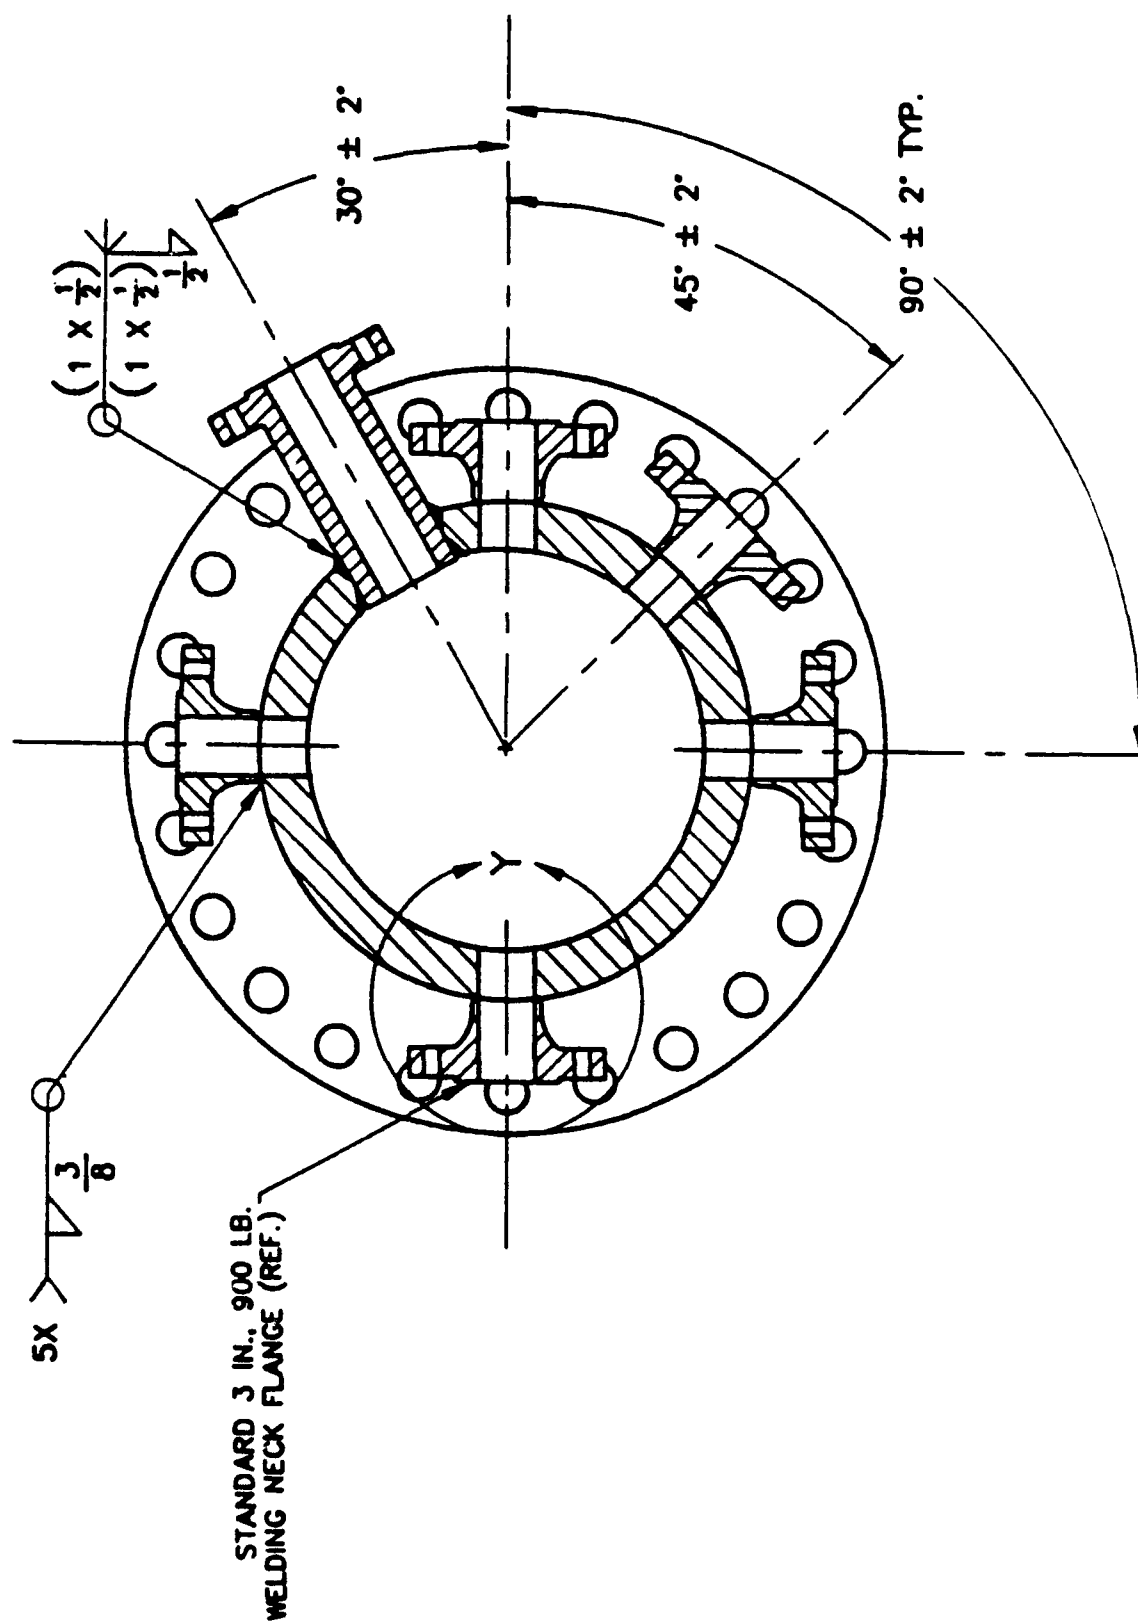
Design Drawing of Pressure Vessel - Top View Showing Side Port Penetrations.
